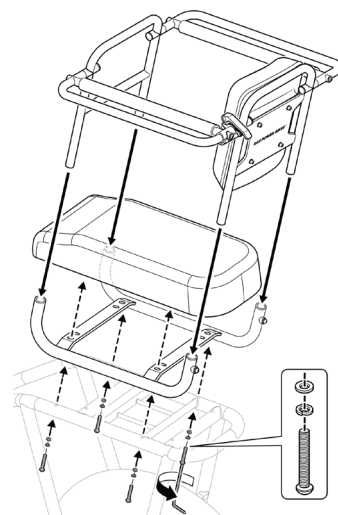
Mounting position on rear rack with thru-bolt mounts.
